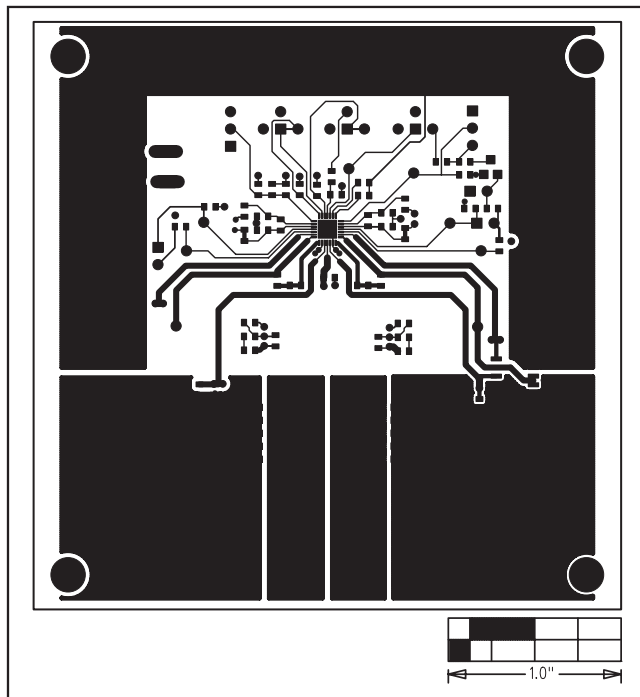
MAX17007 EV Kit PCB Layout—Solder Side
